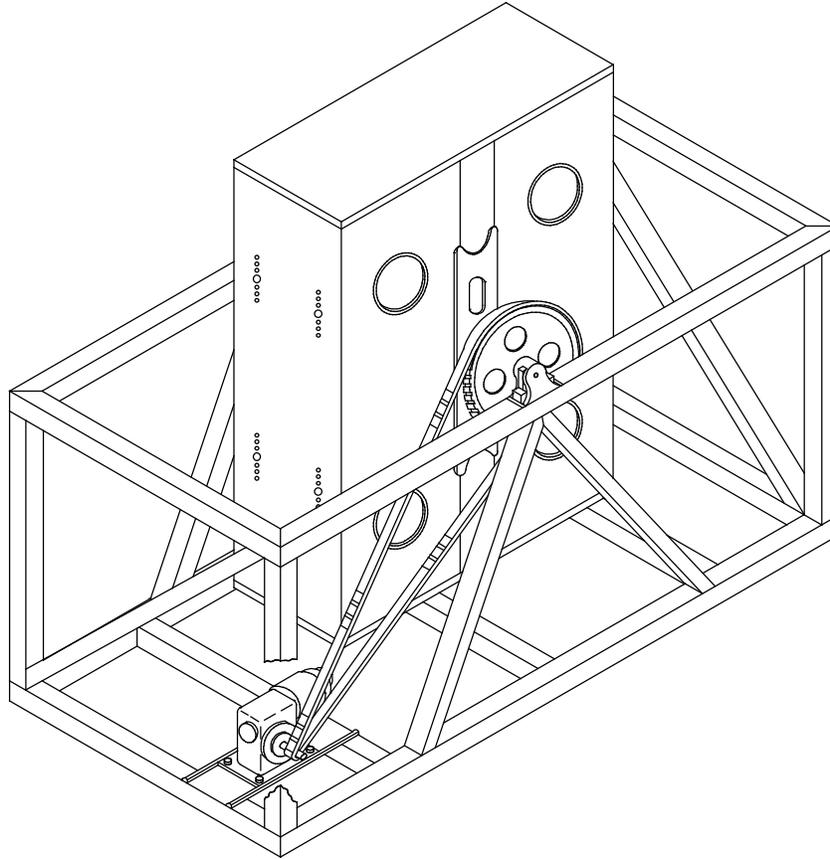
Typical assembly of four-cage random-drop-test machine.
